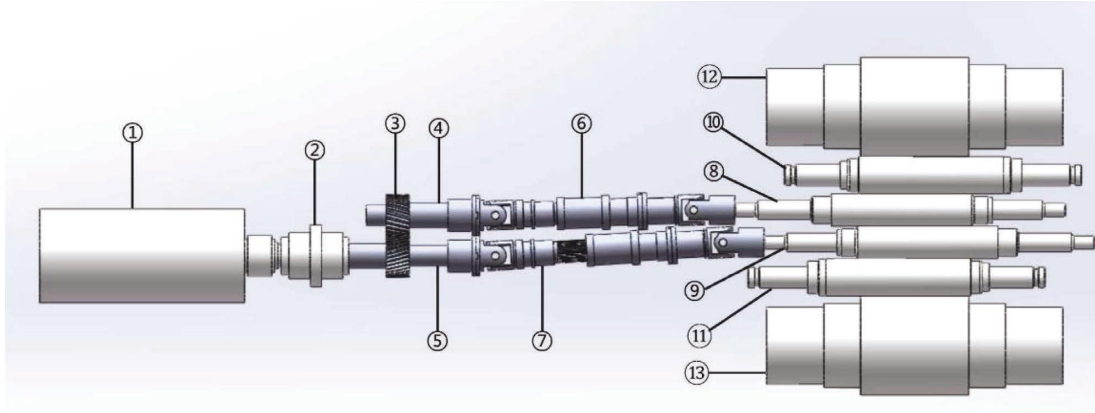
Mechanical structure diagram of the main drive system of F5 rolling mill. ① The motor rotor. ② Arc toothed shaft. ③ Meshing gear. ④ Upper gear shaft. ⑤ Lower gear shaft. ⑥ Upper universal joint shaft. ⑦ Lower universal joint shaft. ⑧ Upper work roll. ⑨ Lower work roll. ⑩ Upper intermediate roller. ⑪ Lower intermediate roller. ⑫ Upper support roller. ⑬ Lower support roller.
